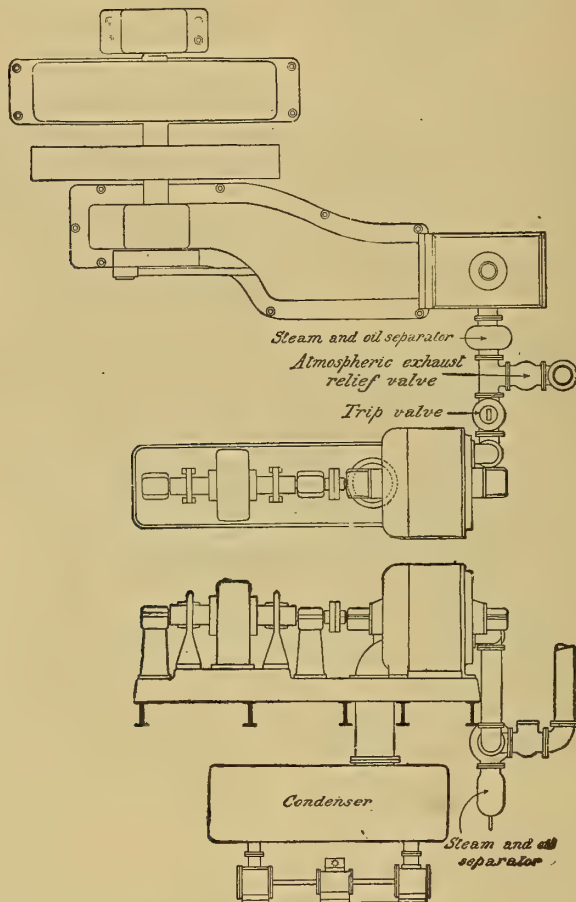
Plan and Elevation of Low-Pressure Turbine Installation.
